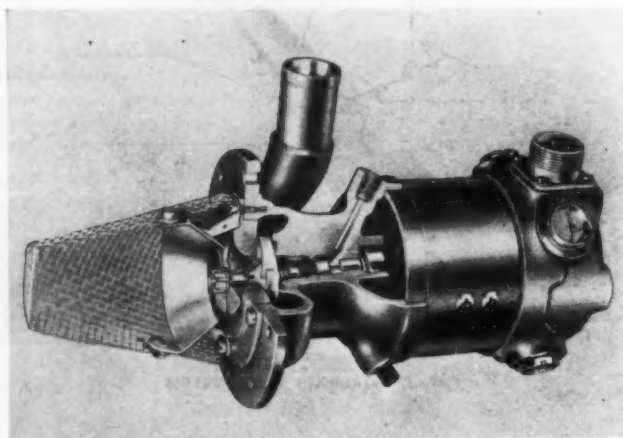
SECTION THROUGH FUEL BOOSTER PUMP
